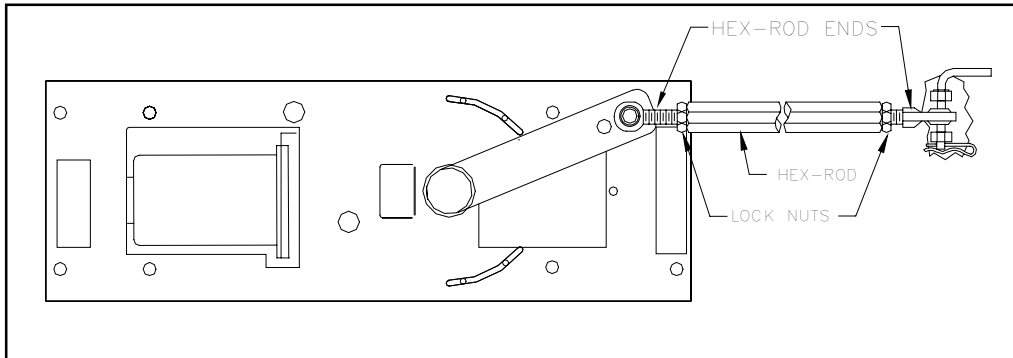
HEX ROD ADJUSTMENT (LEFT REAR DOOR SHOWN; RIGHT DOOR OPPOSITE)
